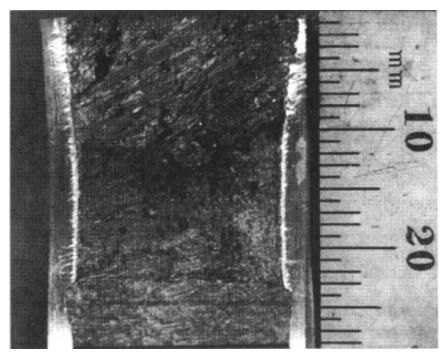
Fracture surface of aged weld metal PWWO tested at 25°C
